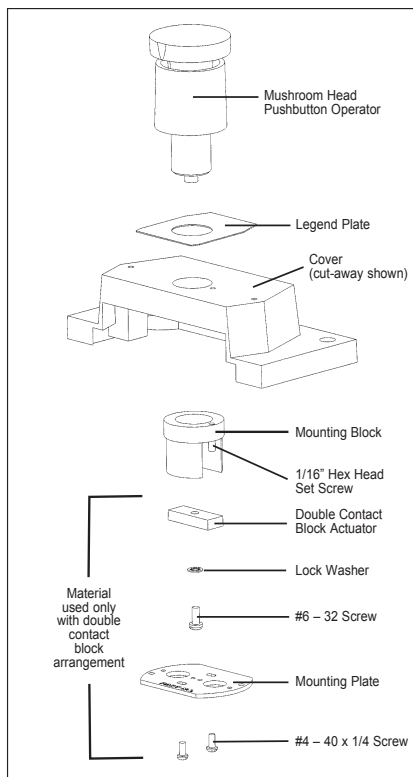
Assembly of Momentary Mushroom Head Pushbutton Operator
